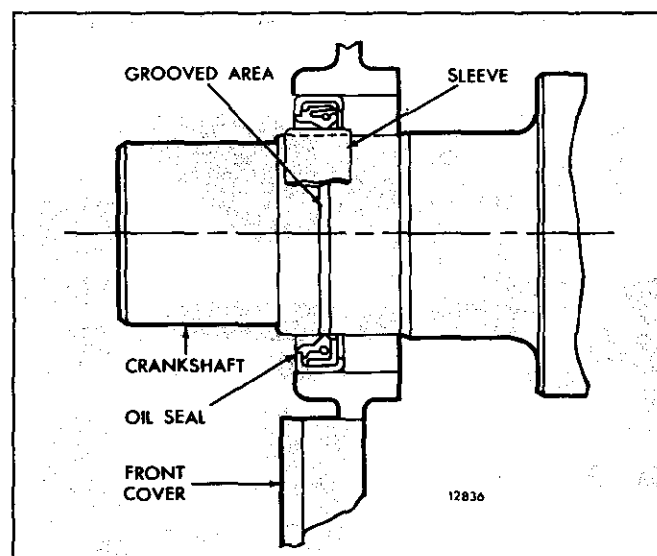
Use of Front Oil Seal Sleeve on Grooved Crankshaft
